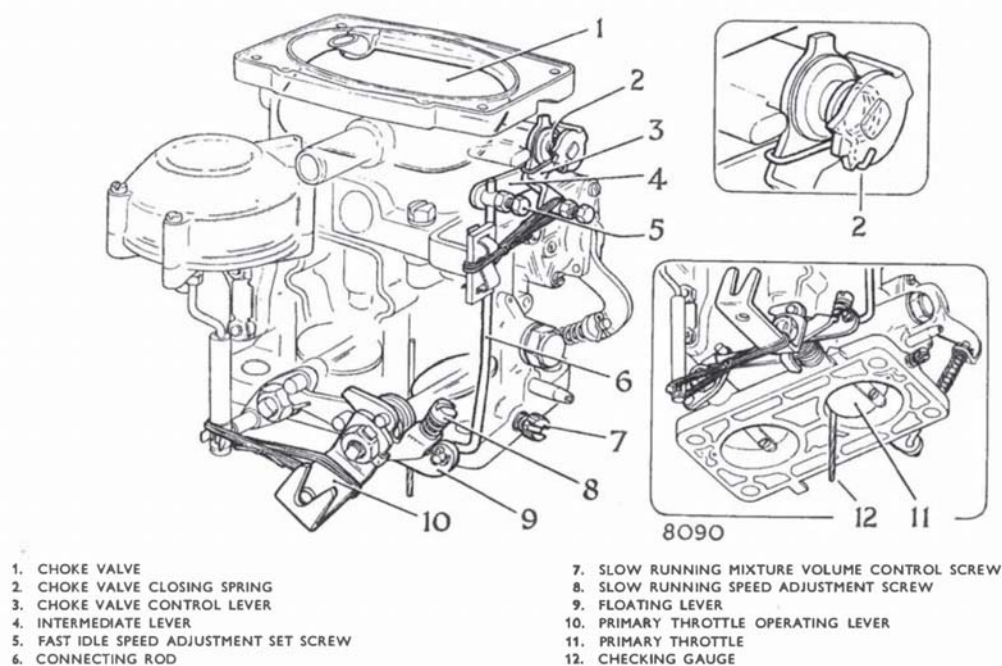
Primary throttle fast idle adjustment and strangler valve return spring adjustment
